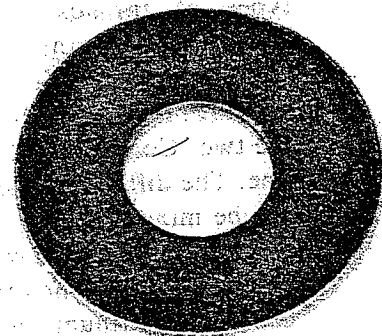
A flat washer is used with a nut, screw or bolt.
